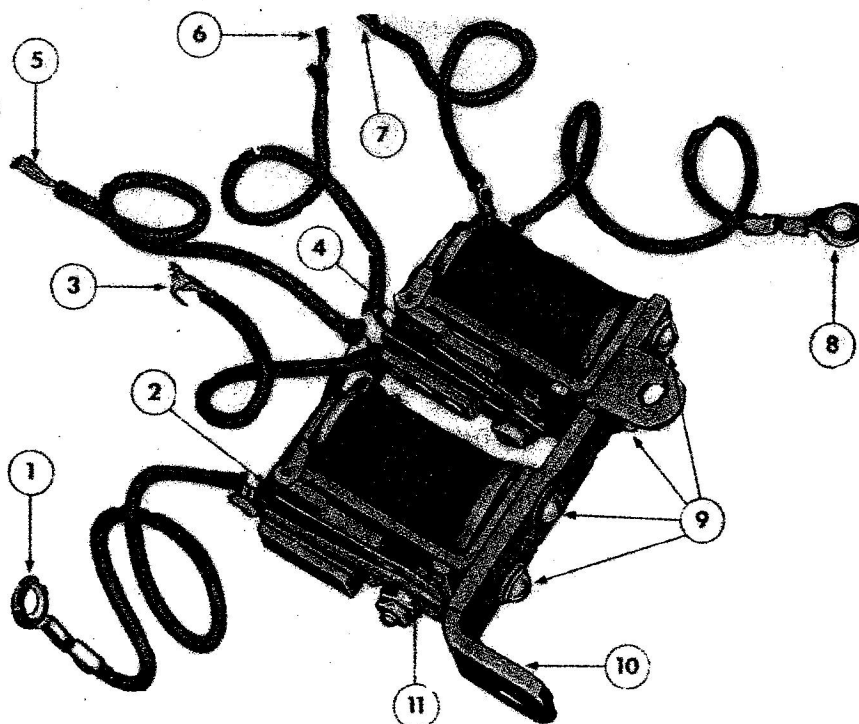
Auxiliary (Telephone-Type) Relay Assembly
